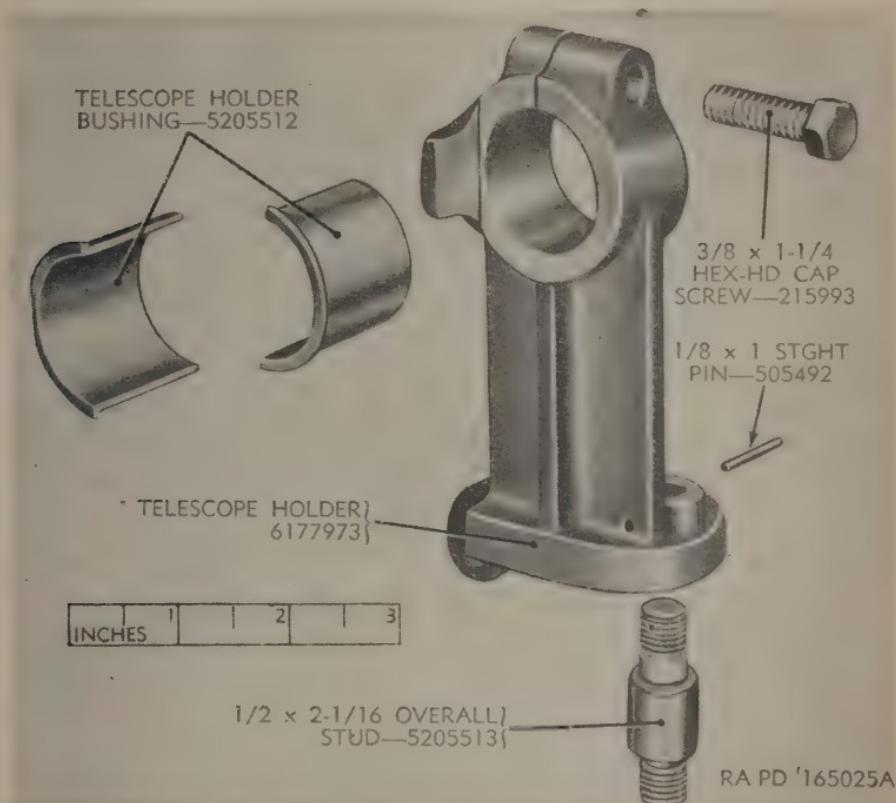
Telescope mount M42—telescope holder assembly—exploded view.
